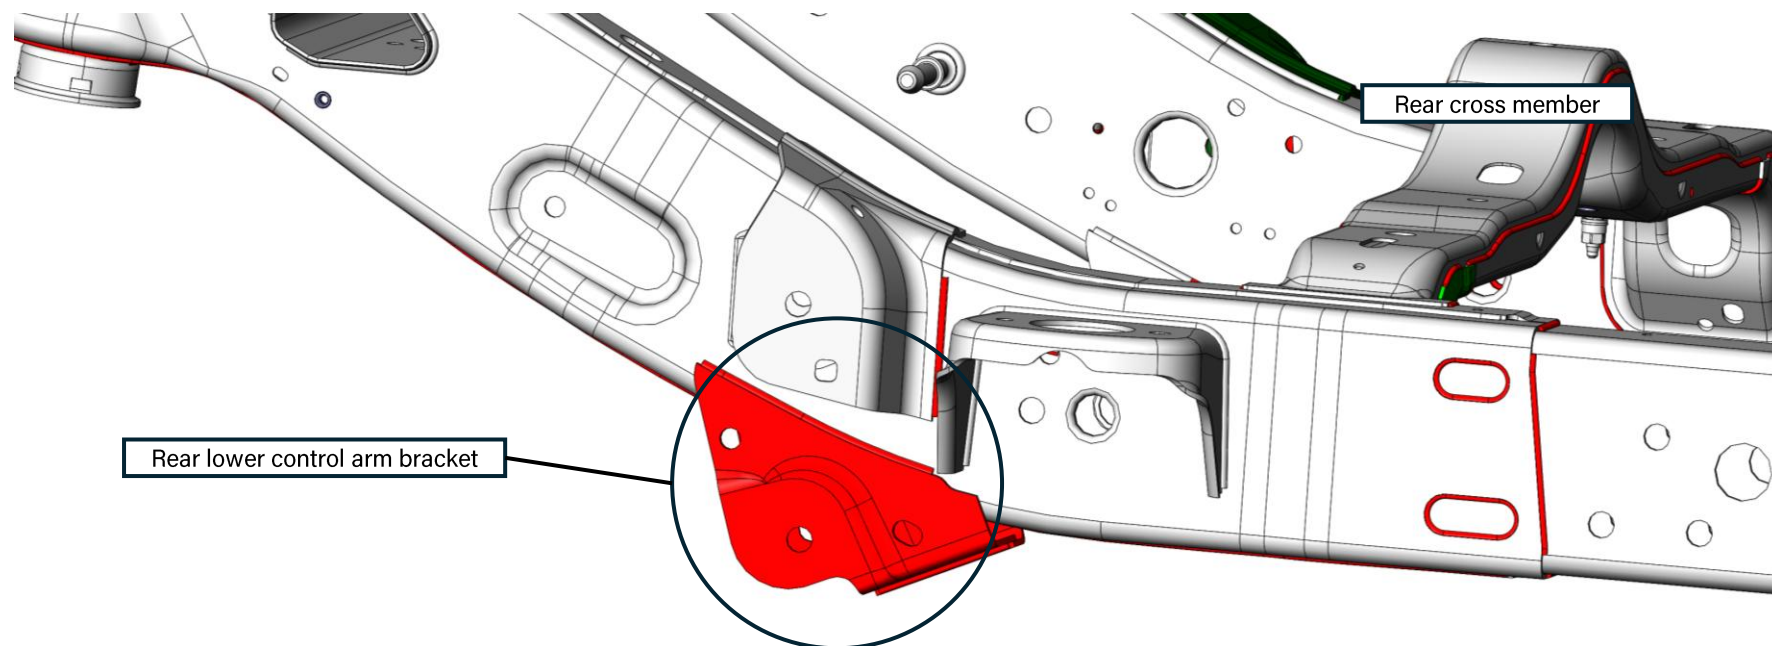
CAD model of original rear lower control arm bracket (passenger side)
